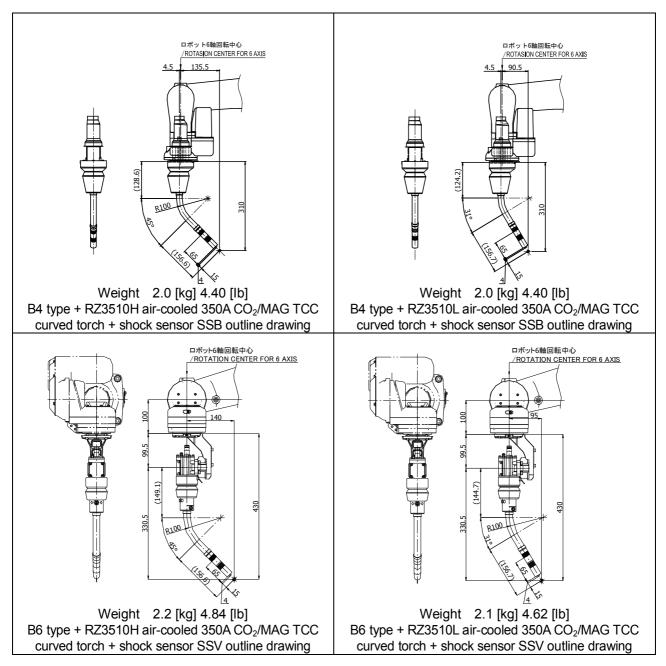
Outline drawing of Air-cooled 350A TCC torch (First diameter nozzle type) (for B4 type, B6 type) Unit (mm)
